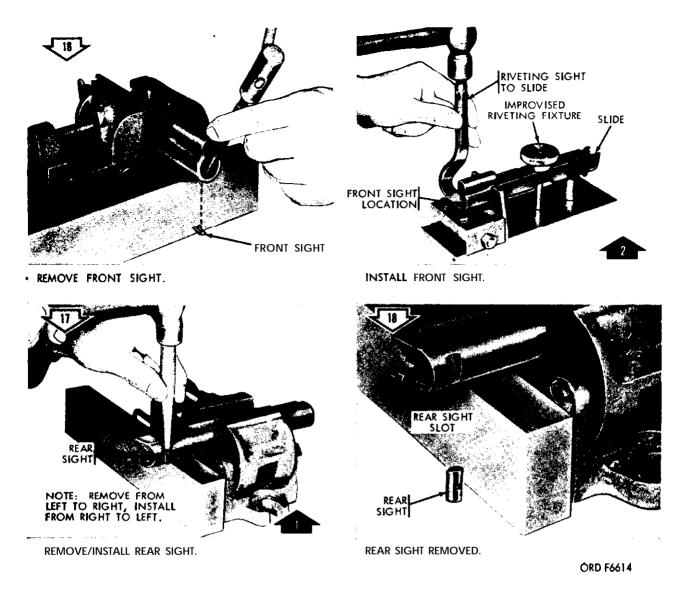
Disassembly/assembly Of barrel and slide group (4 Of 4).
